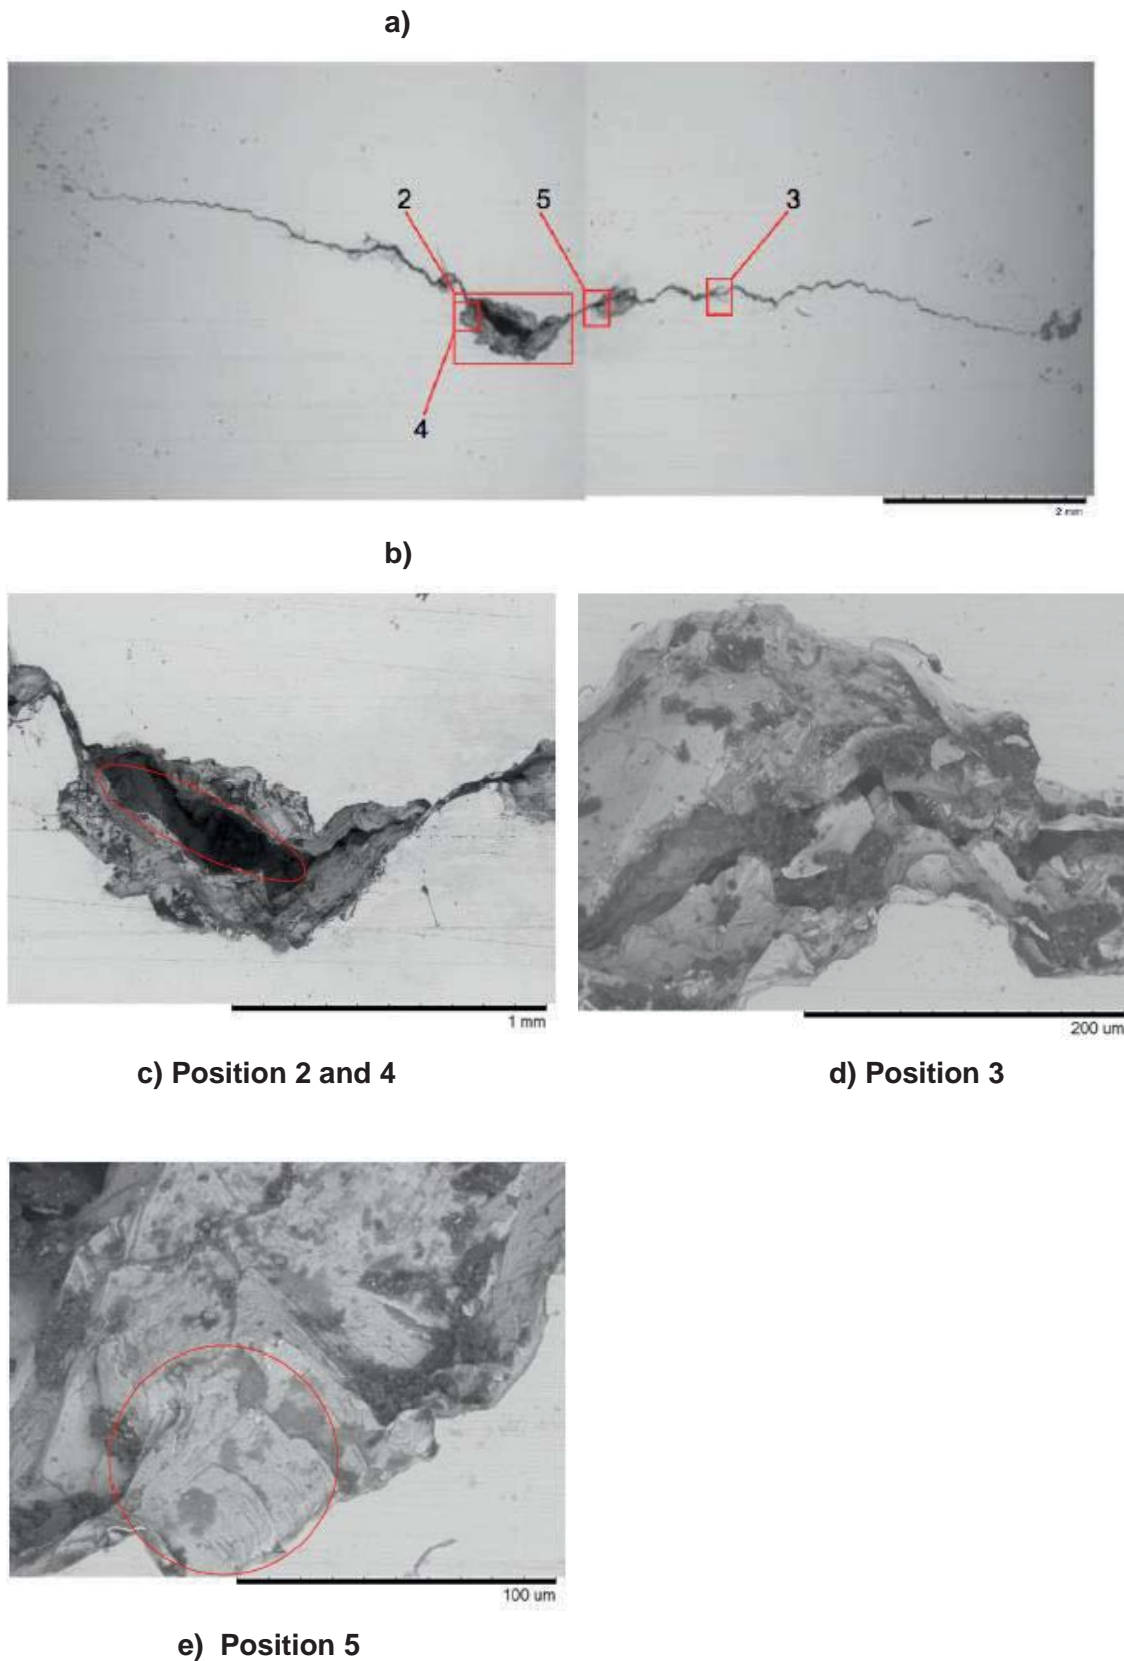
GEBO718_5ZDT120; a) and b) macro crack; c) and d) pitting corrosion; e) striations.
